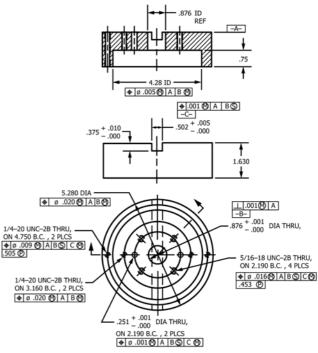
The Outer Shell of the Compression Fixture in English Units
